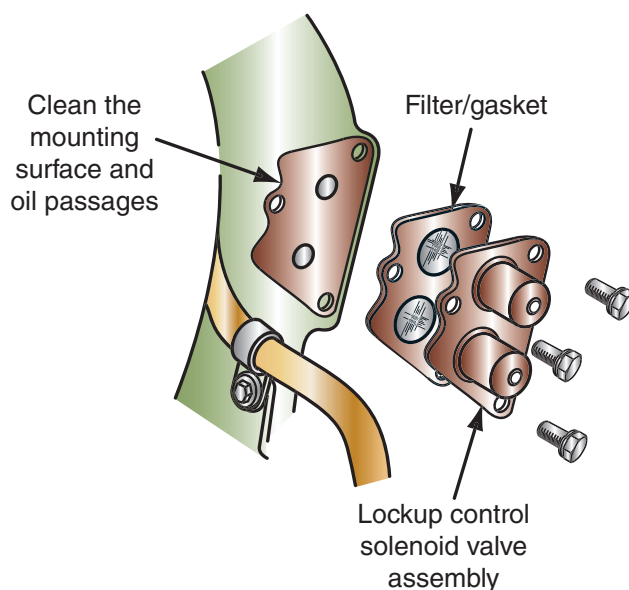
Some torque converter clutches have a replaceable filter.
